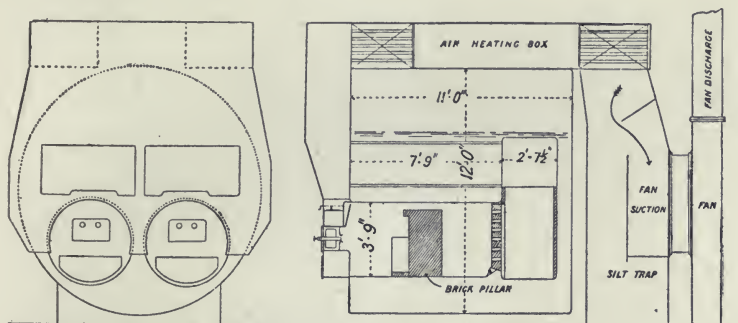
ELLIS AND EAVES SYSTEM, MARINE BOILER ARRANGEMENT, FOR HEATING AIR.
